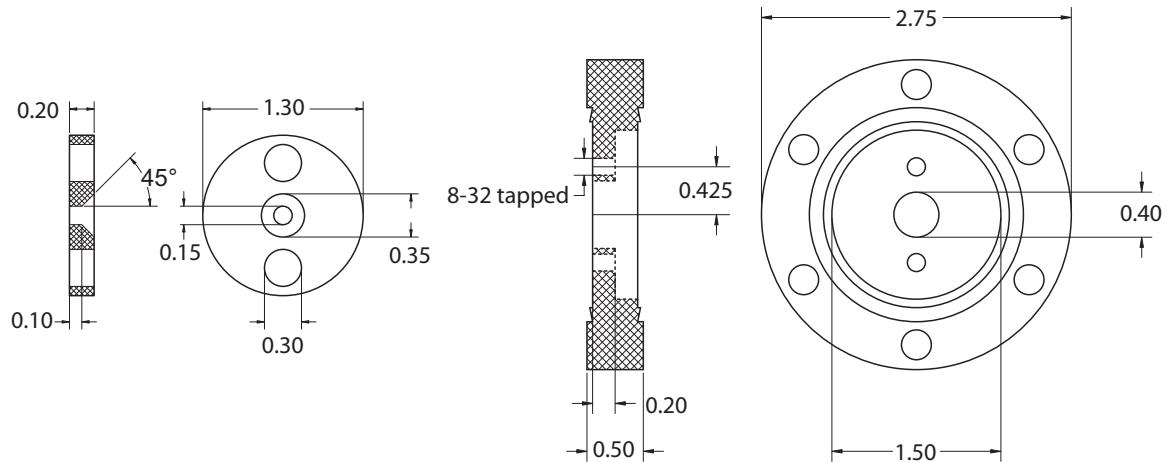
Main oven nozzle. Dimensions in inches. On the right side, the fixed part is machined from a double-sided, 2.75" CF blank. On the left side, the mobile part, is machined from 304 SS stock; the hole in the center is the oven nozzle and its position can be adjusted relative to the center of the two-sided flange. The two parts are kept together with wide head 8-32 machine screws made from 304 SS.
